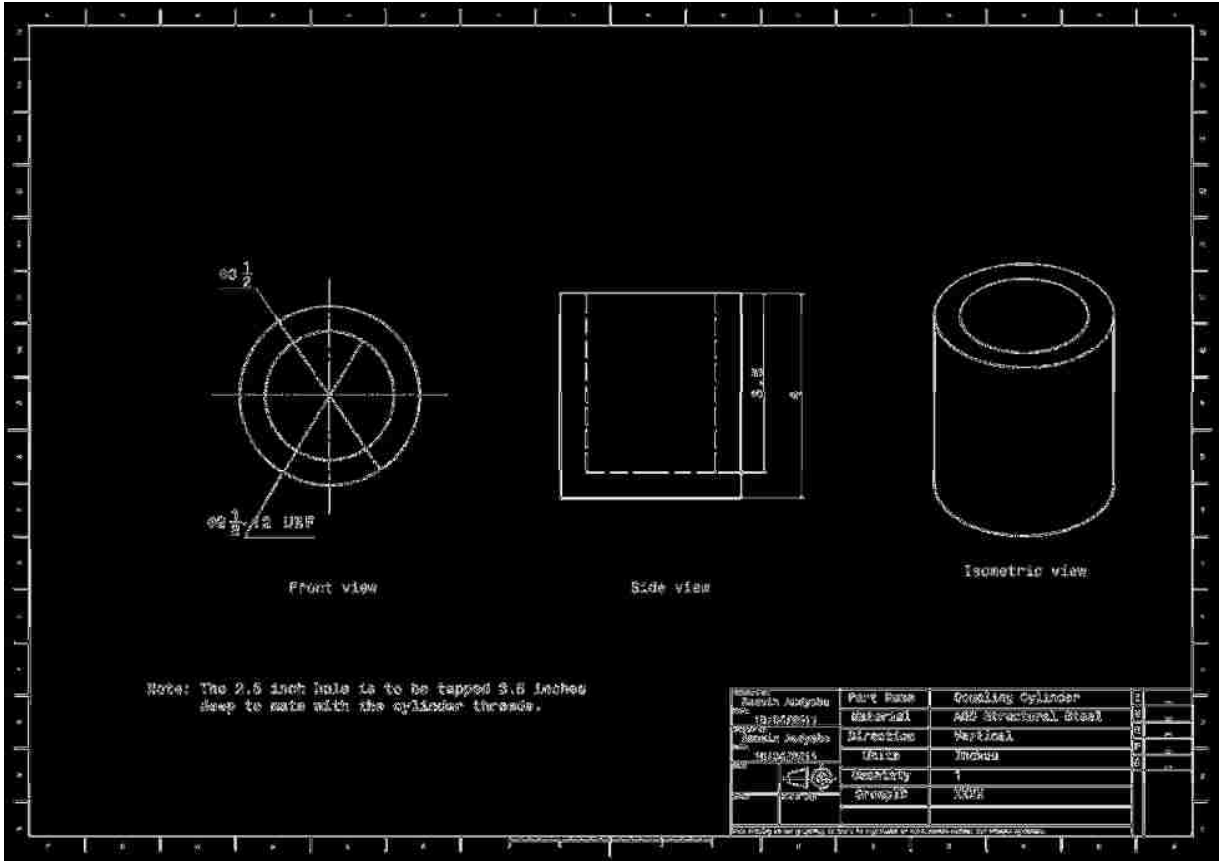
Coupling adapter threading into the hydraulic cylinder.
